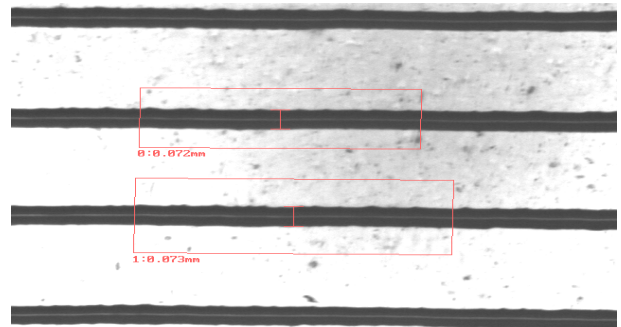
Printed pattern using the plate to plate gravure offset printing system.
